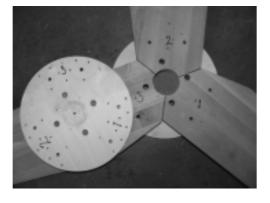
Rotor disassembled and labeled for transport to the tower site.
